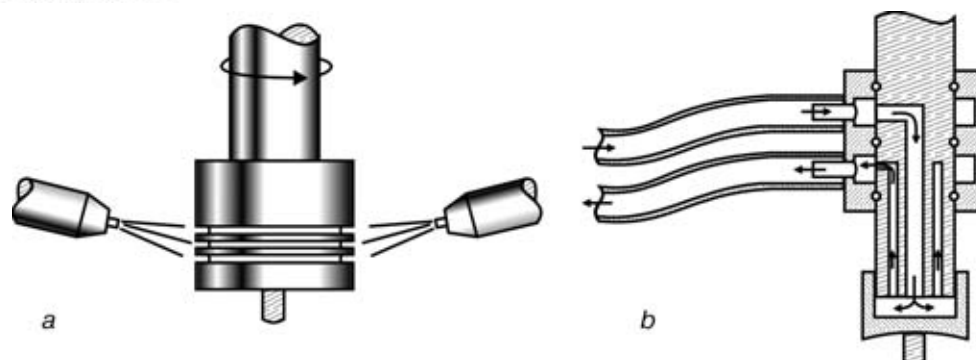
Schematics of working tool cooling with an external (a) and internal (b) feed of the coolant
